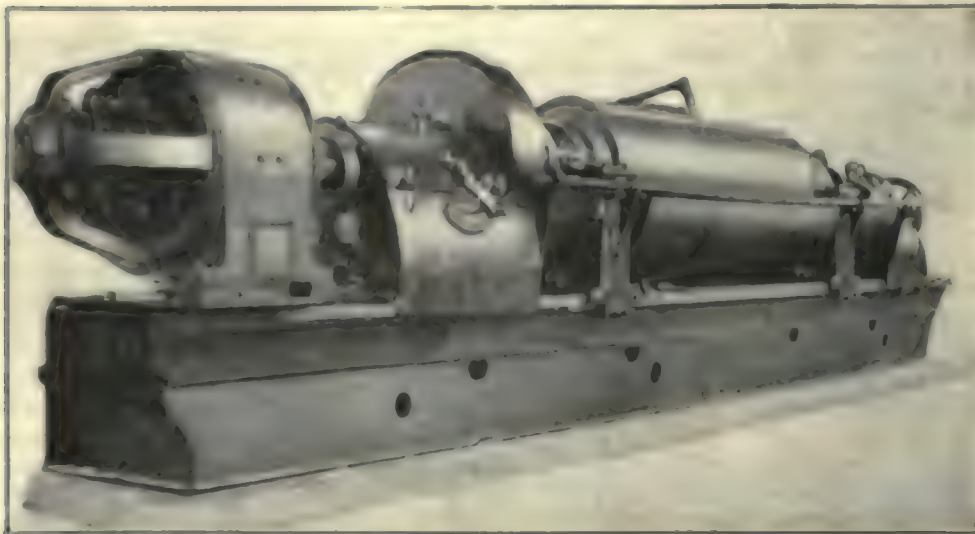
LANDIS HEAVY-DUTY ROLL GRINDING MACHINE
